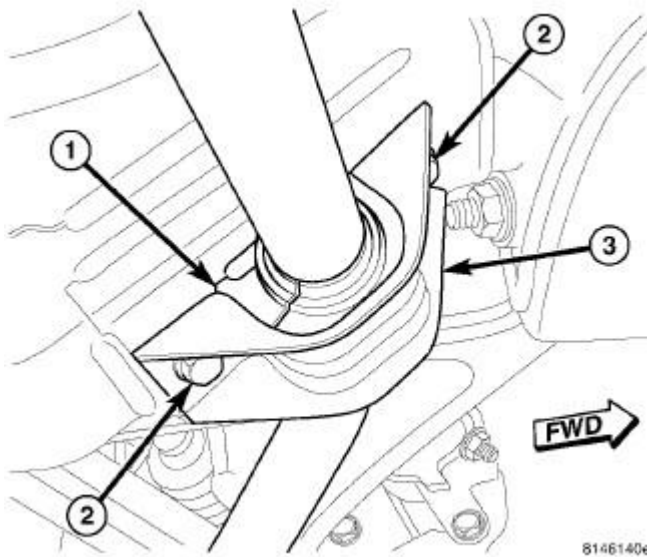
STABILIZER BAR BUSHING AND RETAINER
